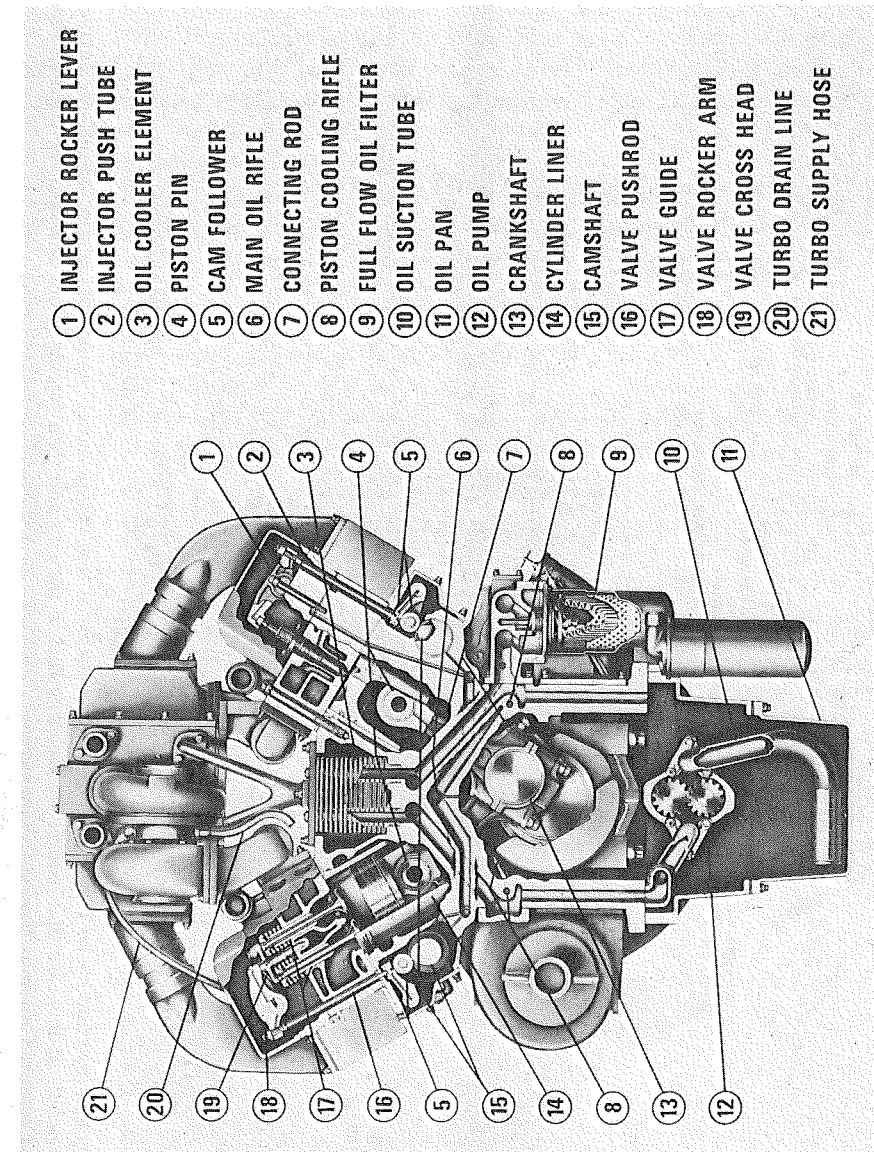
A Cummins direct-injection diesel engine. Courtesy Cummins Engine Company, Inc.
